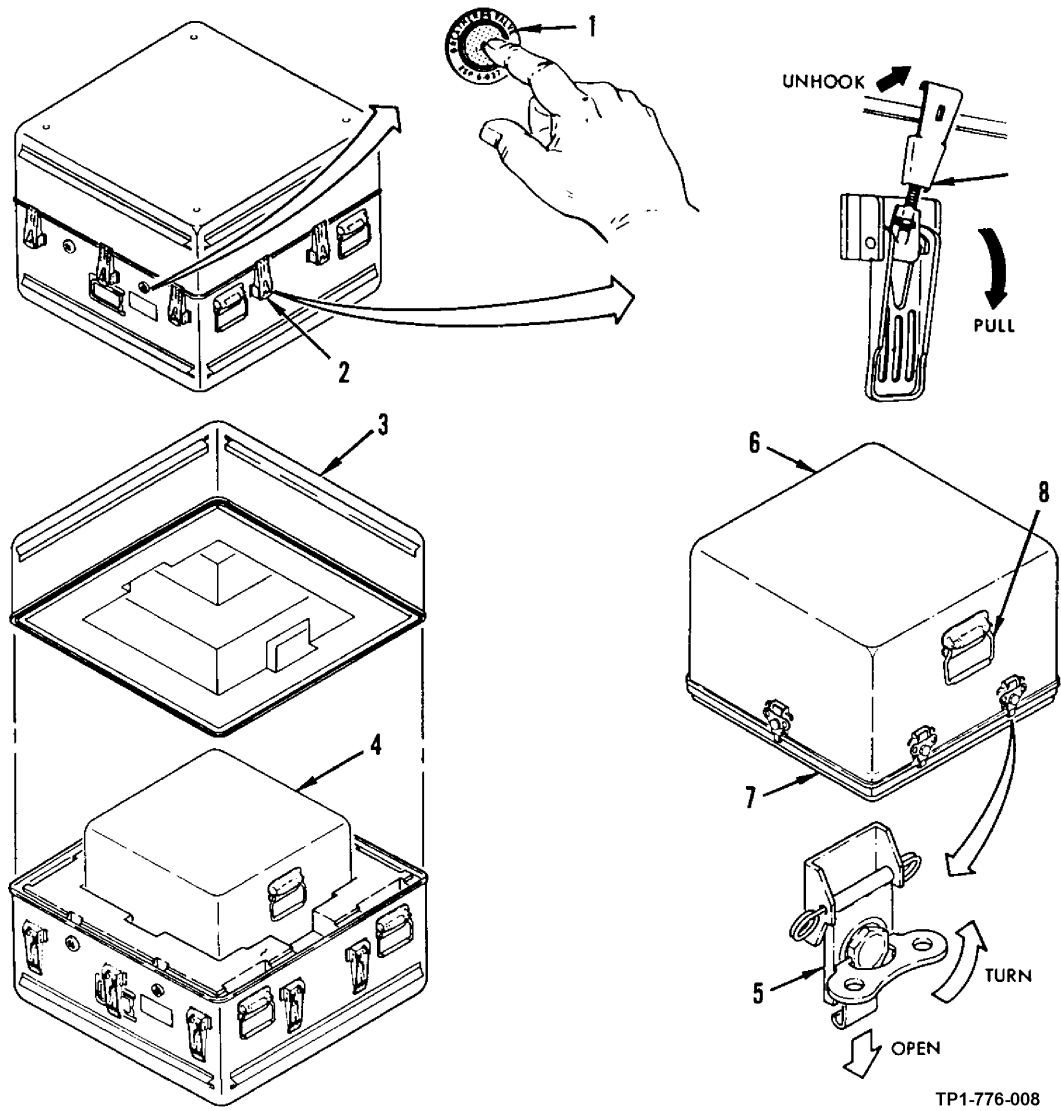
Inner Case Removal from Shipping and Storage Container
